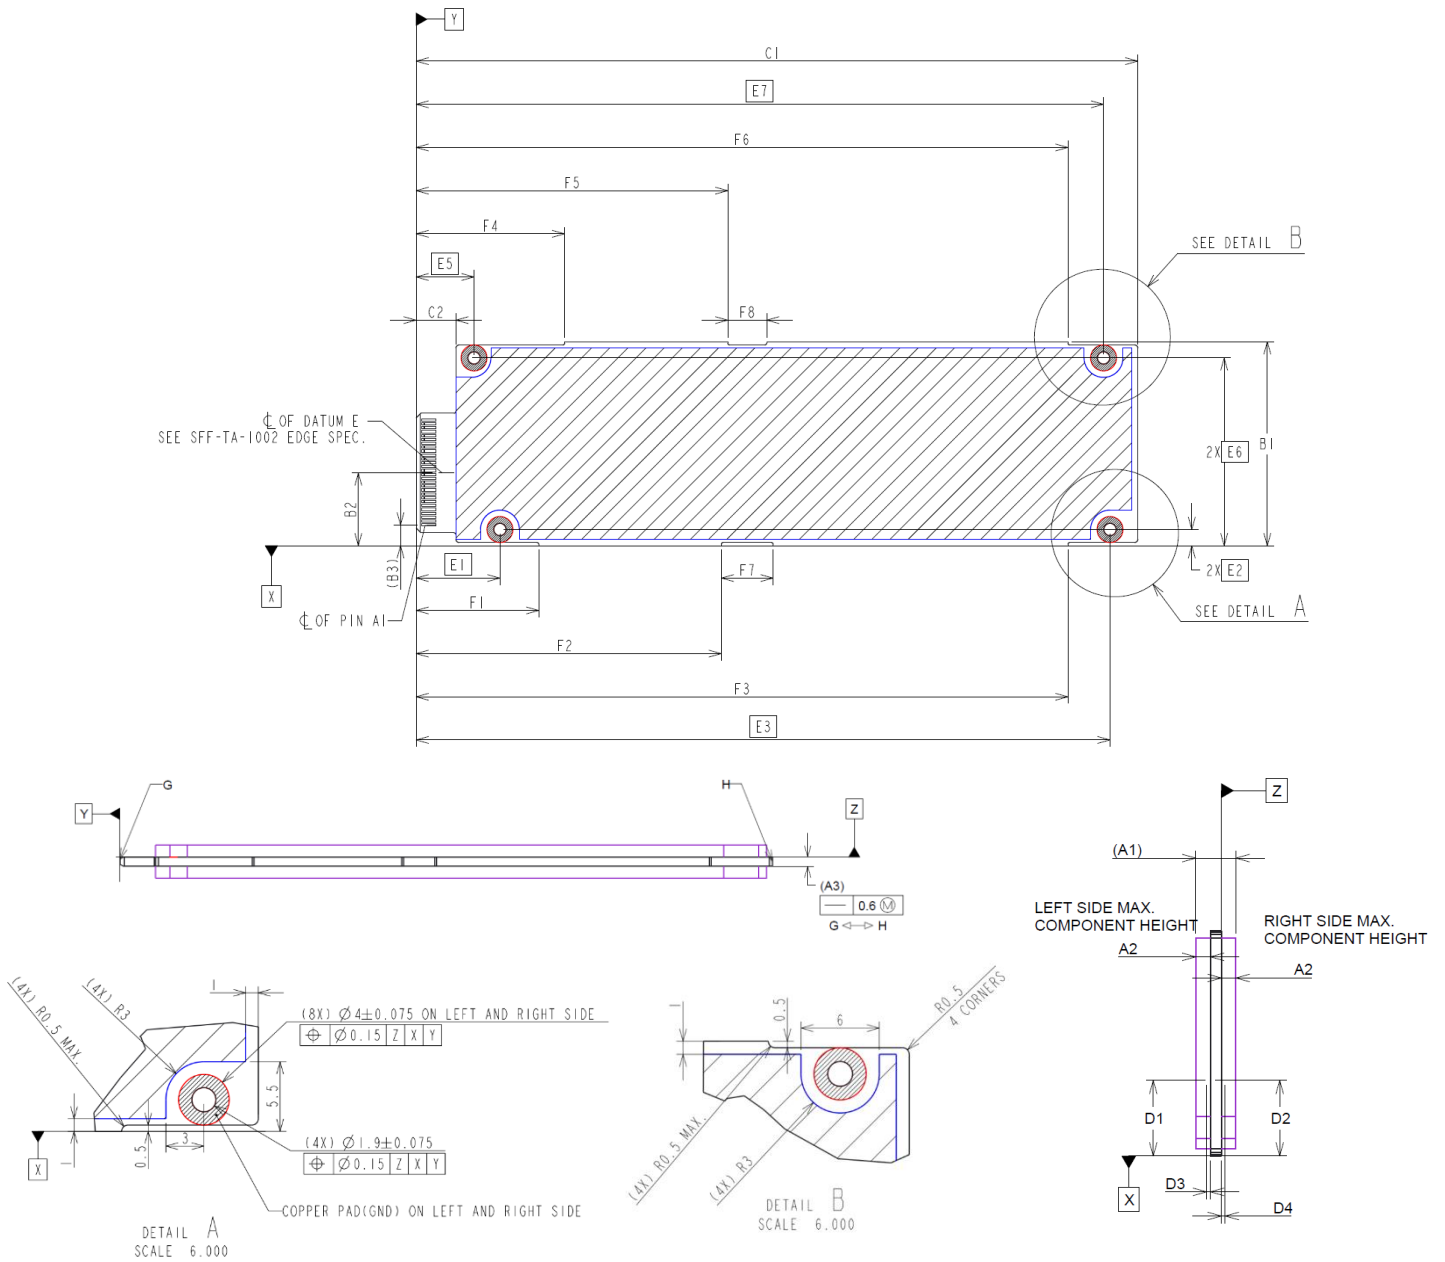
5.9mm Thick (12W) 1U Short Form Factor caseless drawing
